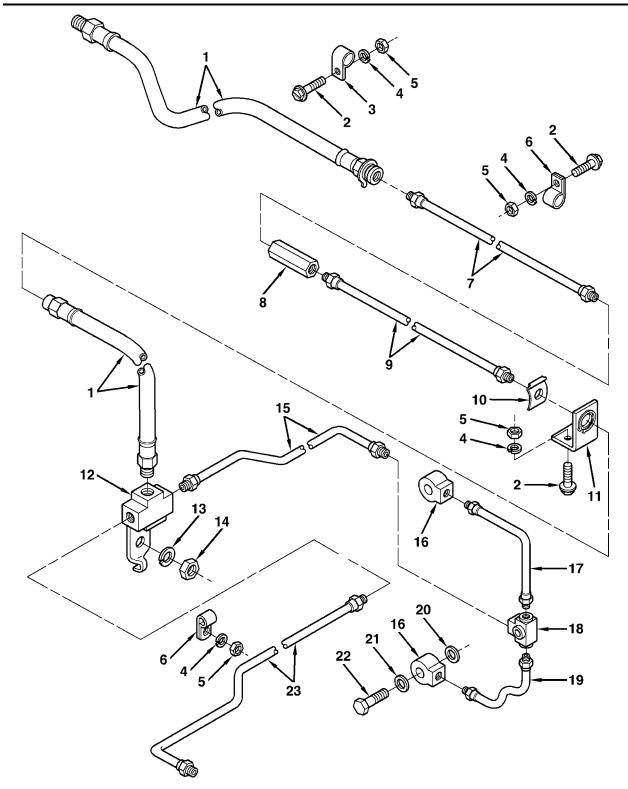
HYDRAULIC BRAKE LINES AND FITTINGS
